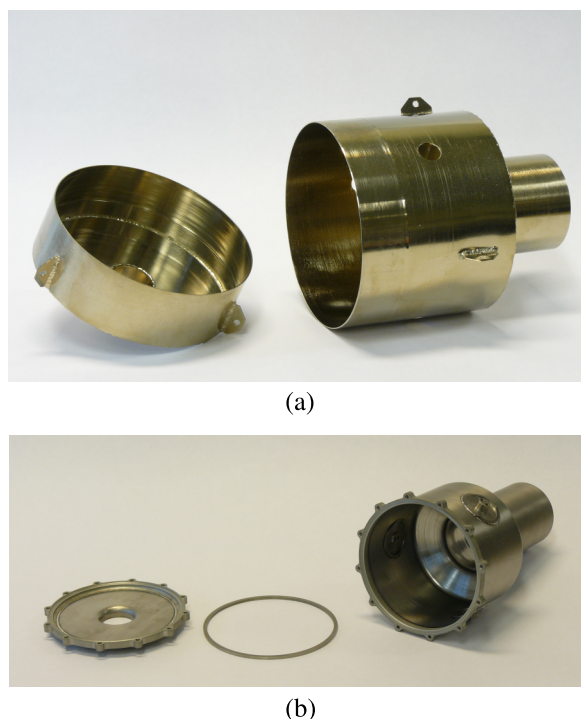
The shielding hardware prior to final assembly. (a) Cryoperm hardware after heat treatment; the turned sections have slightly deviating surface finish. (b) Nb shielding assembly bottom, seal ring, and top part.
